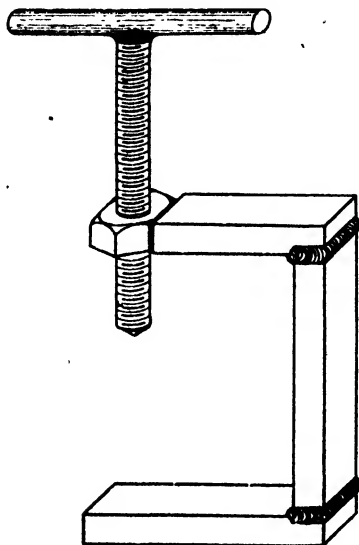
WELDING GRAB CONSTRUCTED BY ELECTRIC WELDING
